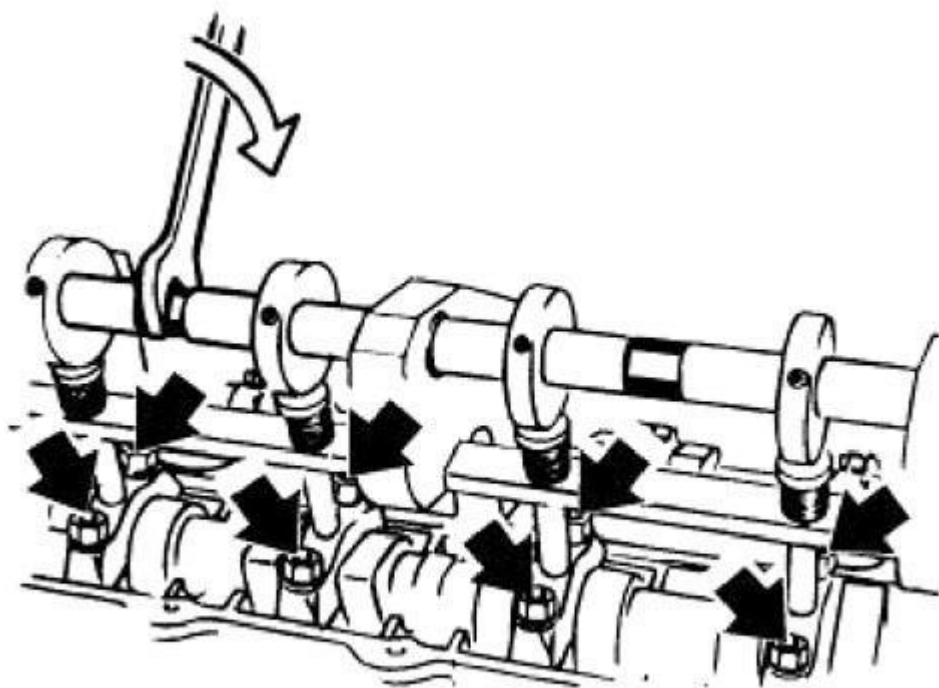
Fitting Special Tool 11 3 260 To Cylinder Head And Screwing Into Spark Plug Threads In Cylinders 1 And 4
